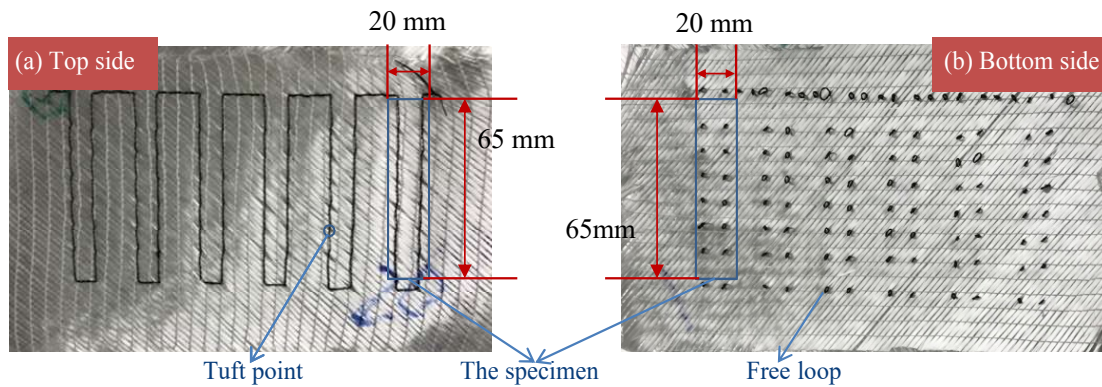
Dry tufted preform (a) top view and (b) bottom view.
